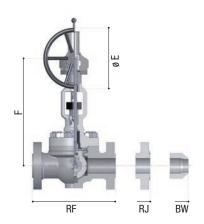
FIGURE NUMBERS - CLASS ASME 300 - ALL SIZES BR 300: RF - RAISED FACE • BR 300: BW - WELDING ENDS • BR 300: RJ - RING JOINT
